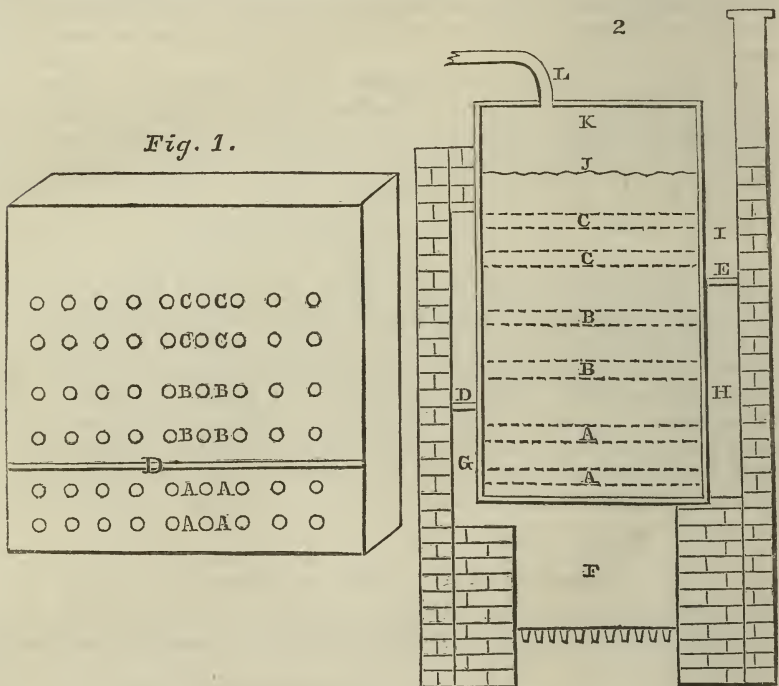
is a side view of the boiler A A, B B, and C C, being the open ends of the tubes through which the heated air from the furnace is to pass, as will be shown more distinctly in fig. 2. D, is one of the ledges or partitions which project out from the boiler, occupying the space between it and the masonry in which the boiler is set, and causing the draught to enter the tubes A A, in order to its returning through those marked B B.
